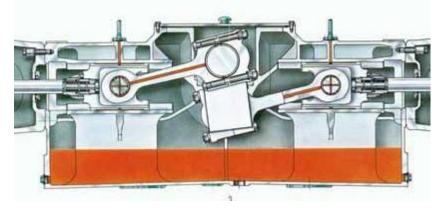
Crankshaft, connecting rods, crossheads on typical opposed cylinder machine
